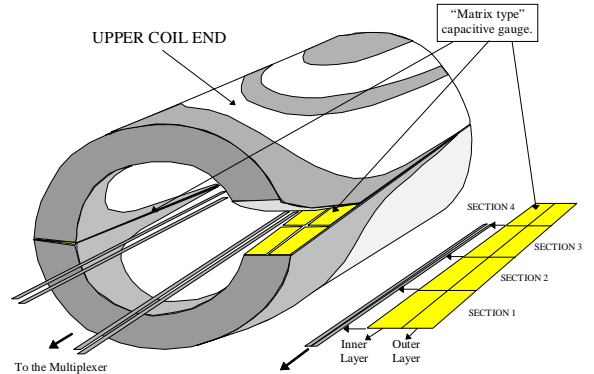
Measuring coil pre-stress in the heads : layout of gauges.
